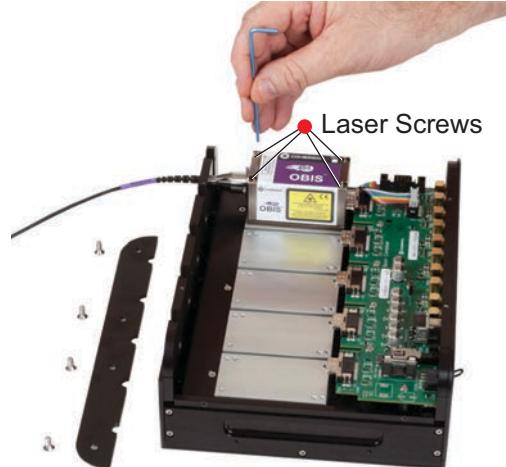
OBIS Laser Box Attaching the Laser to the Heatsink
